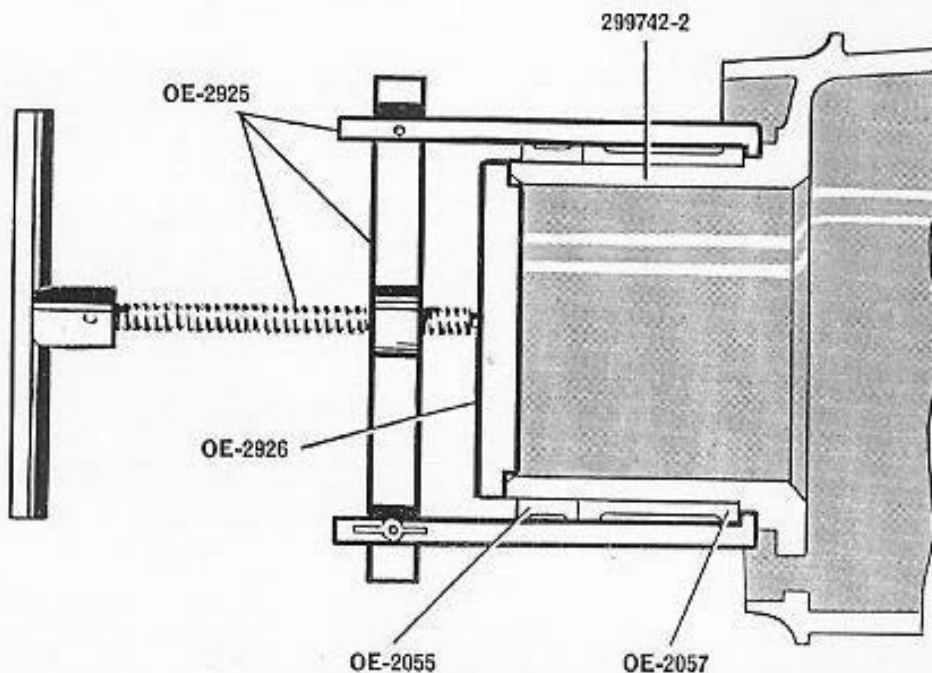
Removing bevel and spur wheel gear bushing (OE-2057) and pedestal head bushing (OE-2055) from fixed pedestal casing (299742-2)
